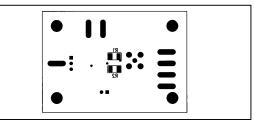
MAX840 EV Kit Component Placement Guide-Solder Side (not shown to scale)
